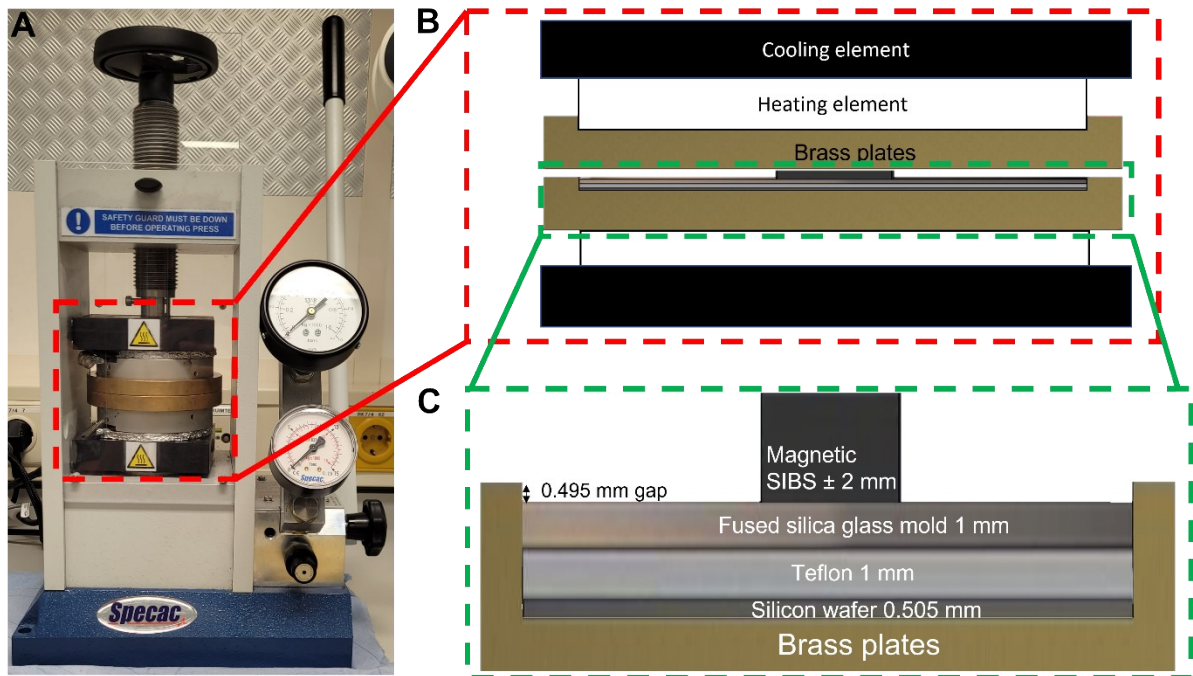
A: Hot embossing machine from Specac Ltd Limited, England used for fabrication. B: Cut out section of the hot embossing machine showing the cooling and heating elements as well as the position of the brass plates (bronze), mould and magnetic SIBS (black). C detailed cross section showing how the mould is positioned inside the brass plates. For the second hot embossing step, the 1 mm Teflon layer is replaced by a 0.2 mm-thick layer of Teflon.
